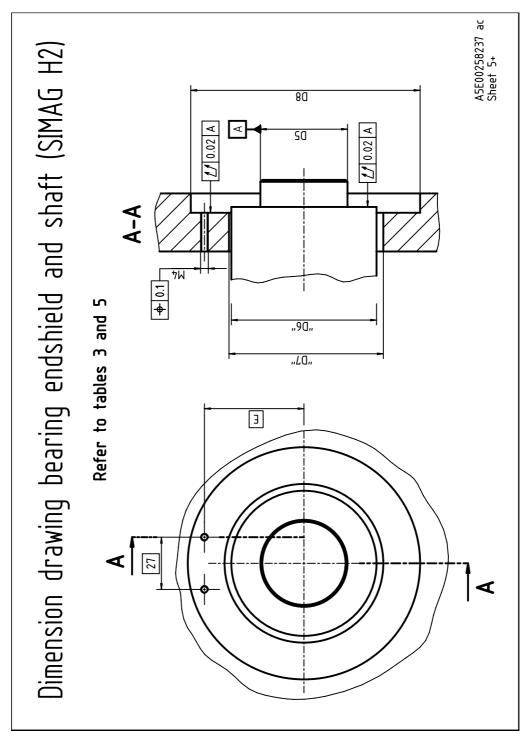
Dimension drawing, bearing end shield and shaft (SIMAG H2)
